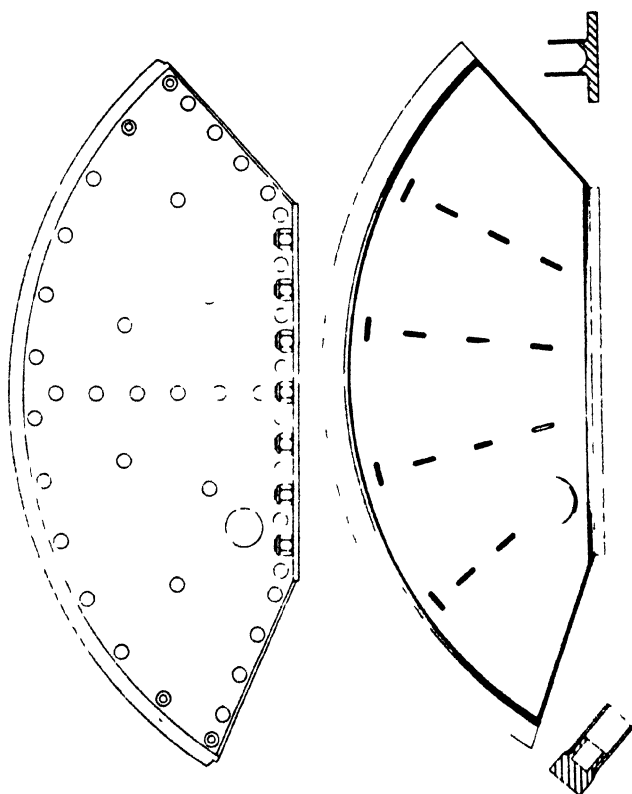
and Fig. 36. Line drawings indicating the general features of construction for the riveted and welded elevating gear sectors.
